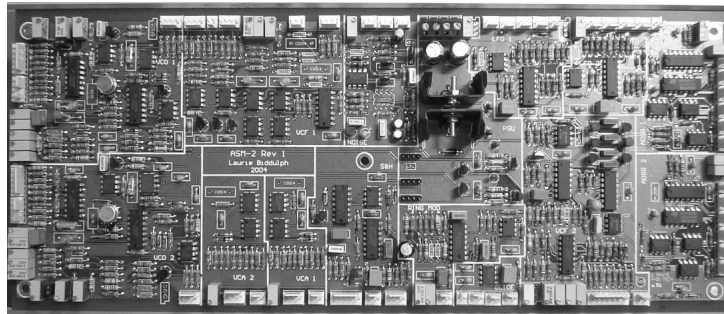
Printed circuit board with through-hole technology. Source: Elby Designs
